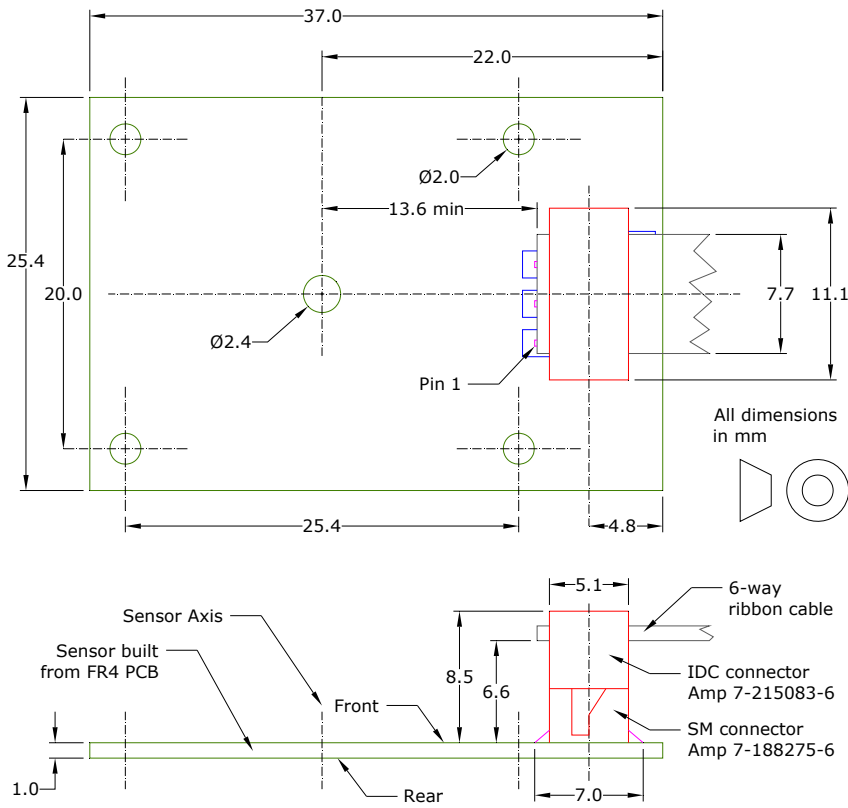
sensor board part number 013-0006 mated with connector 013-6001
